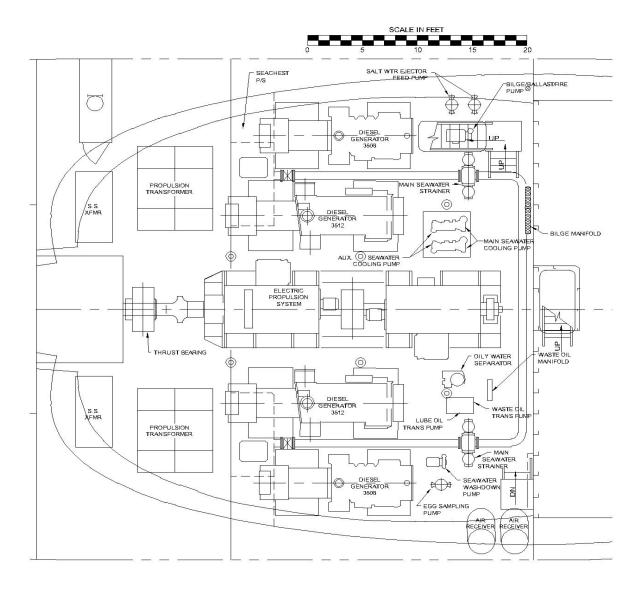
Main Machinery Room (Lower Level) for Existing Equipment on the Oscar Dyson
